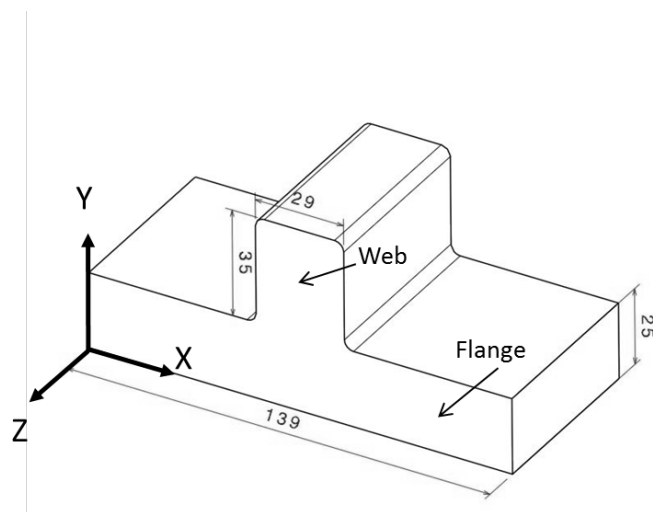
Specimen geometry of the extruded Al 2099 T8 T-bar showing the web and flange locations. All dimensions are in mm.
